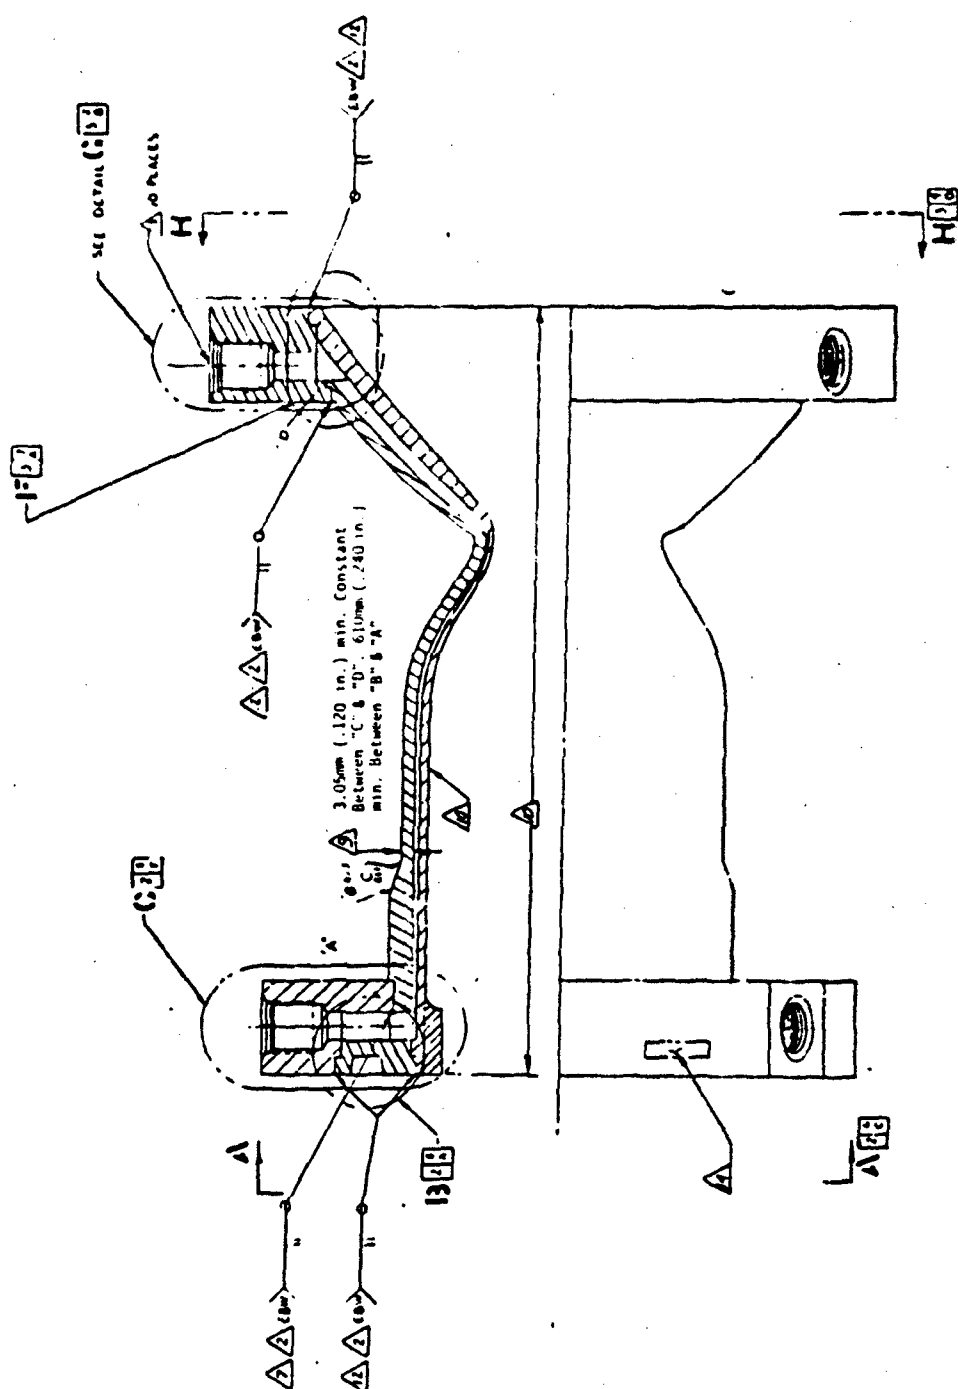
Thrust Chamber Design With Separate Flanges For EB Welding After Columbium Close-Out Deposit
